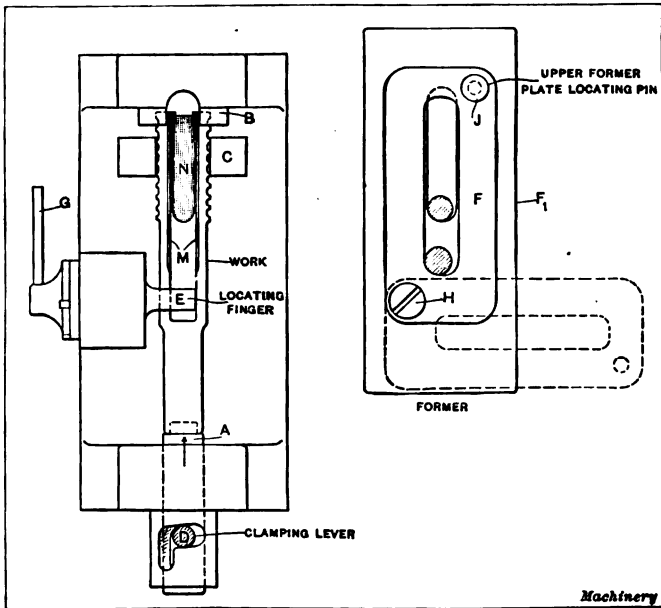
Plan View of Profiling Fixture and Former for Bolt of Automatic Pistol
